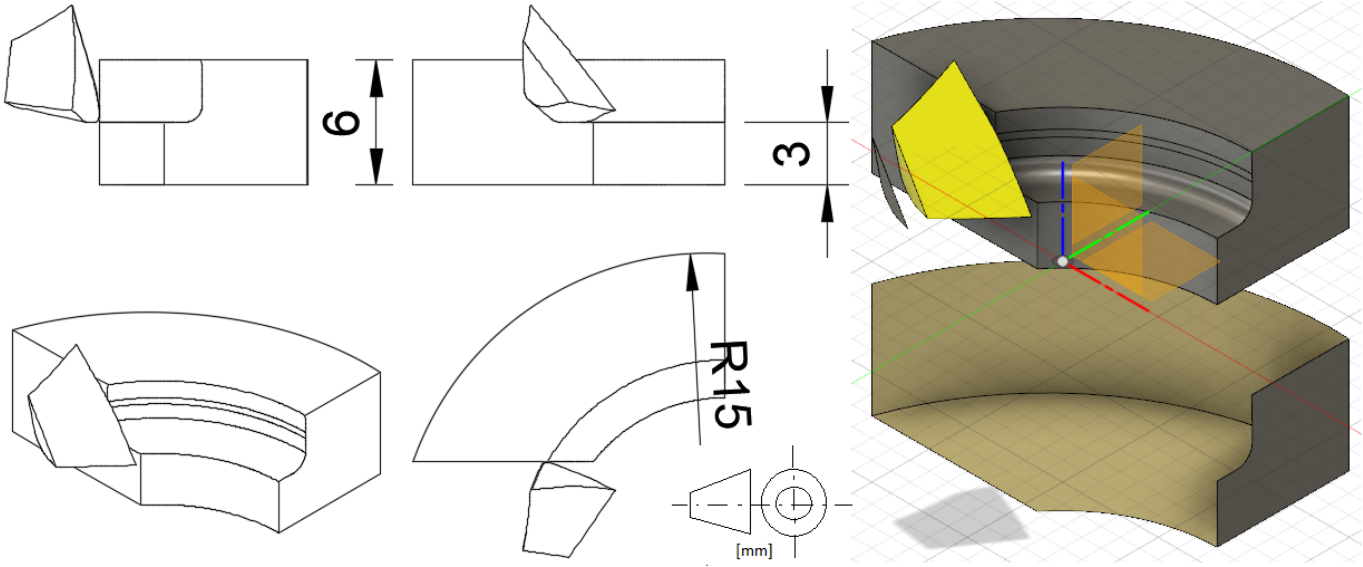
Final tool, workpiece and fixturing assembly for the “Square Shoulder” case
